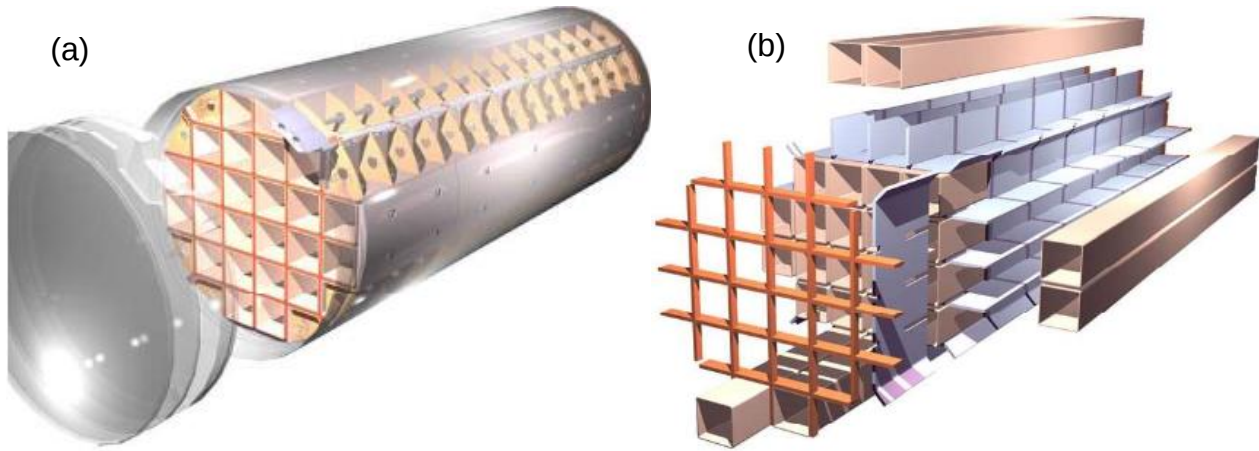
(a) A 3D view of the canister modeled, with the shell and (b) an exploded view without the shell
